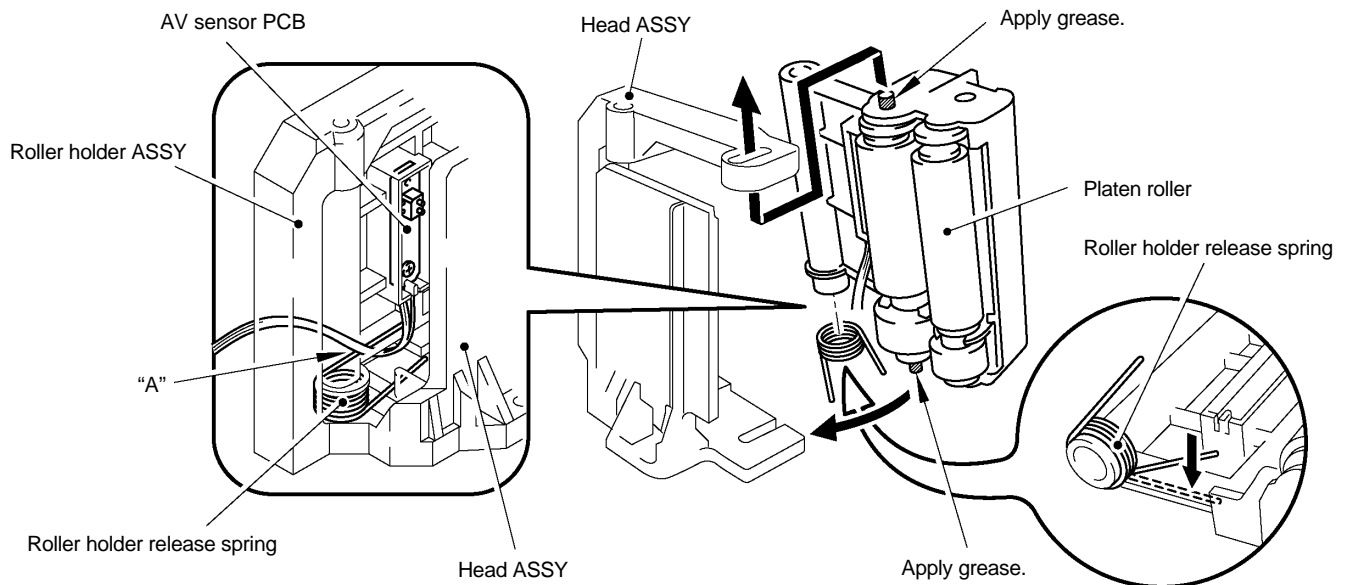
Reassembling the Head/Roller Holder Unit (2)
